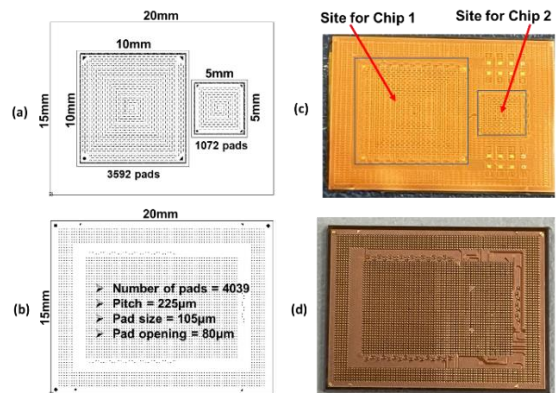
RDL-substrate. (a) Top view. (b) Bottom-view. (c) Fabricated top-view with glass removed and Ti/Cu etched. (d) Fabricated bottom-view.
